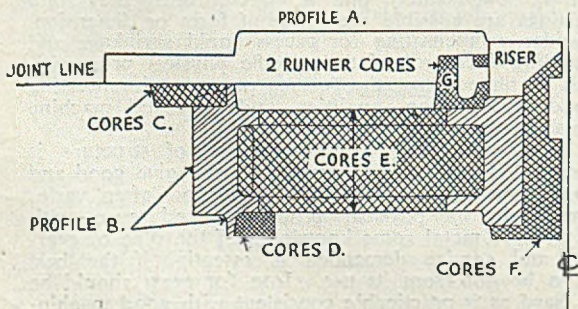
SECTIONAL VIEW OF THE MOULD AND CORES.
